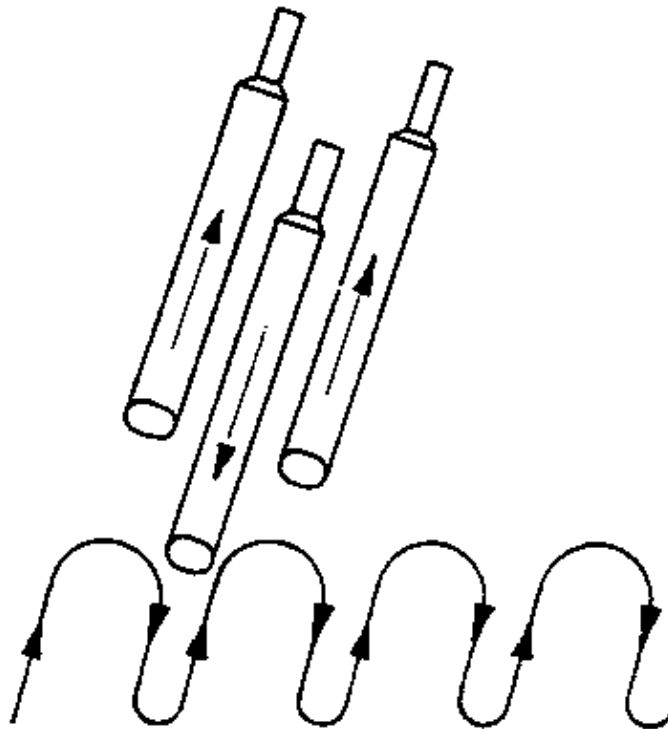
Touching and retouching motions of the electrode for welding the root pass
